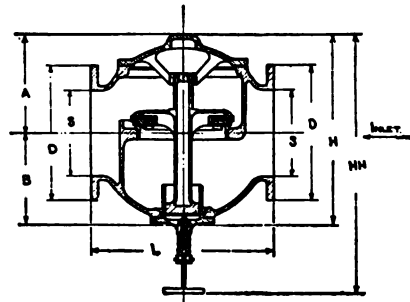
Blake Horizontal Automatic Exhaust Relief Valve.
